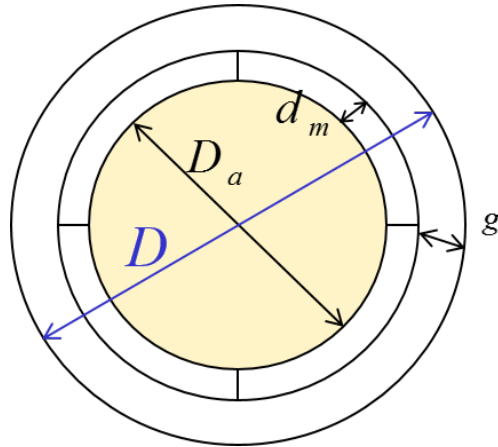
Rotor with multi-pole surface-mounted magnets
